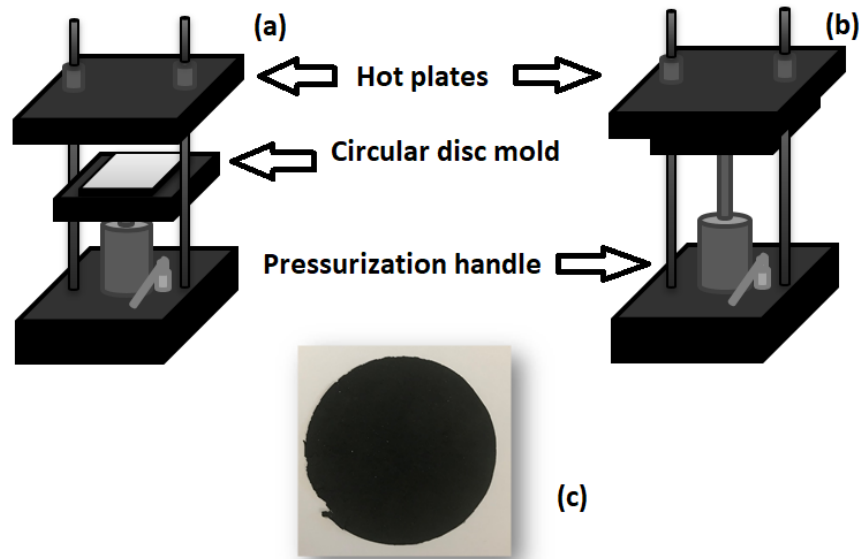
Demonstration of compression molding process: (a) preparing; (b) compressing; (c) circular disc of sample of compressed mold.
